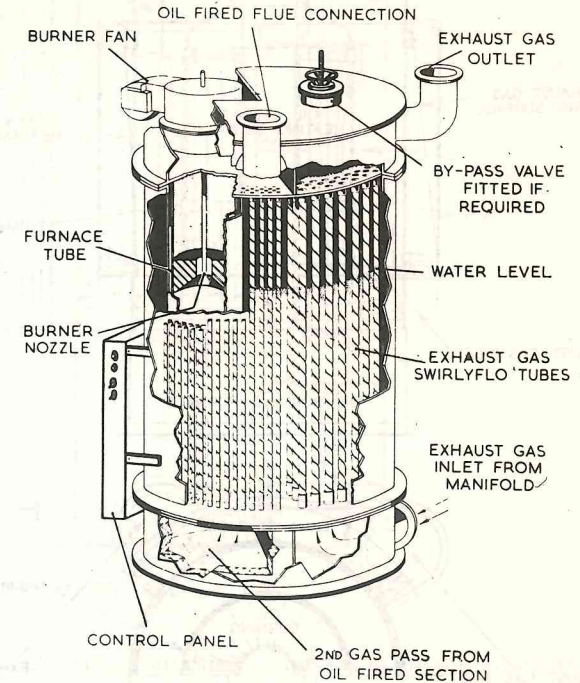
Cut-away view of Spanner composite boiler (see also Chapter 3)
